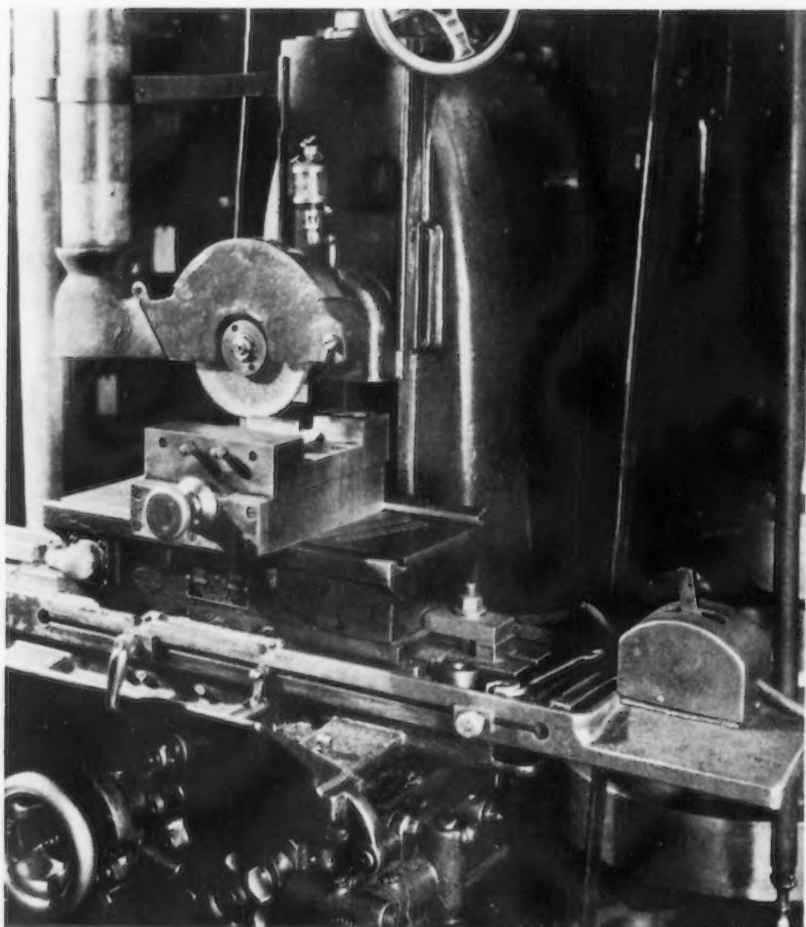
The set-up for grinding spindle seats in the carrier. Indexing wheel is mounted directly upon the spindle carrier shaft.
